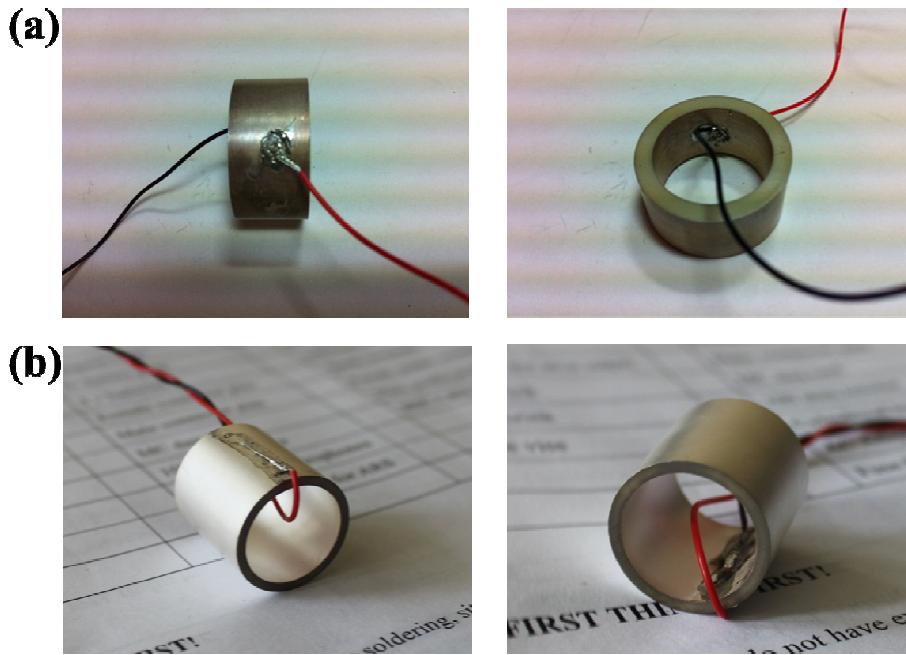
Solder red wire to outside of piezo-ceramic cylinder, and black wire to inner surface of cylinder. Wires may be soldered in (a) a circle or (b) along the cylinder axis.
